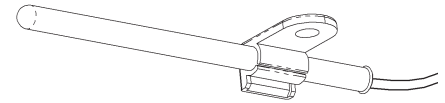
Flexible Probe Bracket Break-Off Tab Dimensions and Mounting of Remote Probe
